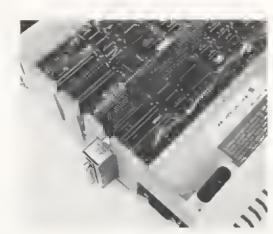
SSC in Slot #2 and Clamp Assembly in Notch
